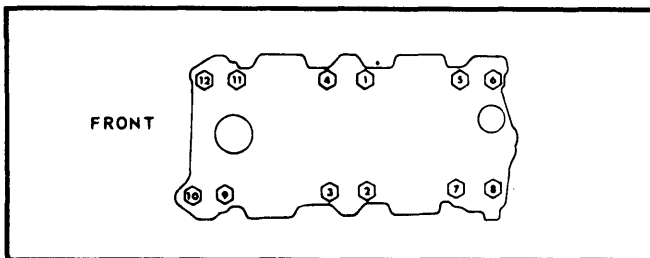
305", 350" & 400" Intake Manifold Tightening Sequence
